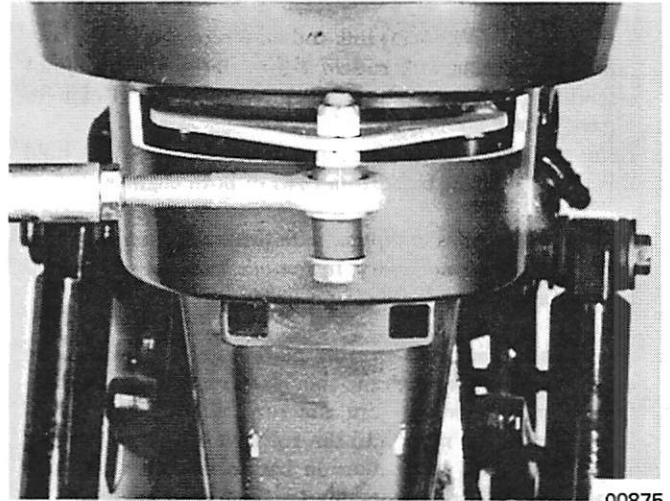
Balljoint and Steering Plate Installed Right (Starboard) Engine
